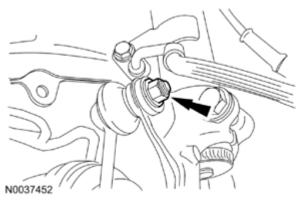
Locating Stabilizer Bar Link Nut Courtesy of FORD MOTOR CO.
